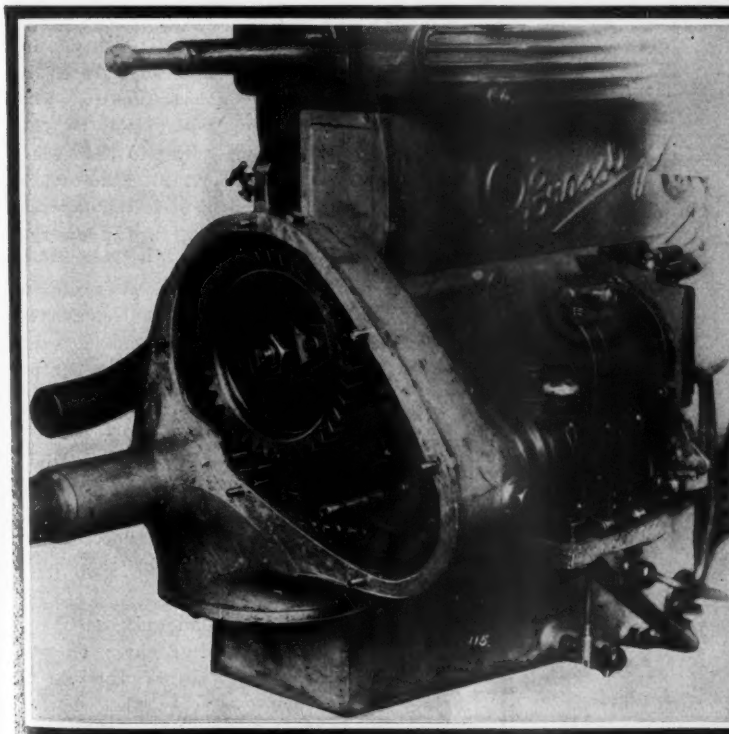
CHAIN DRIVE FOR CAMSHAFTS ON THE CROSSLEY 1912 MOTOR
